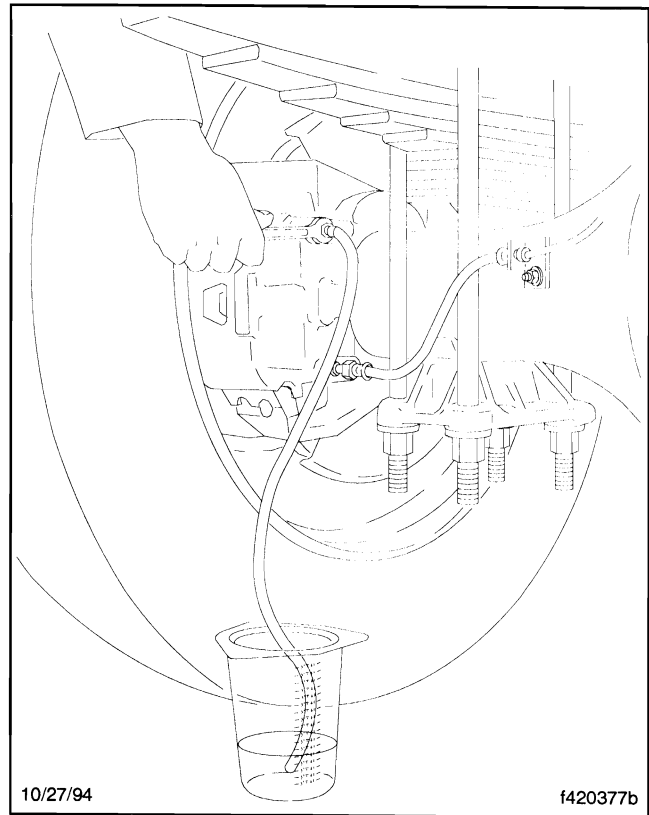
, Bleeding the Connections at the Rear Wheel Calipers
